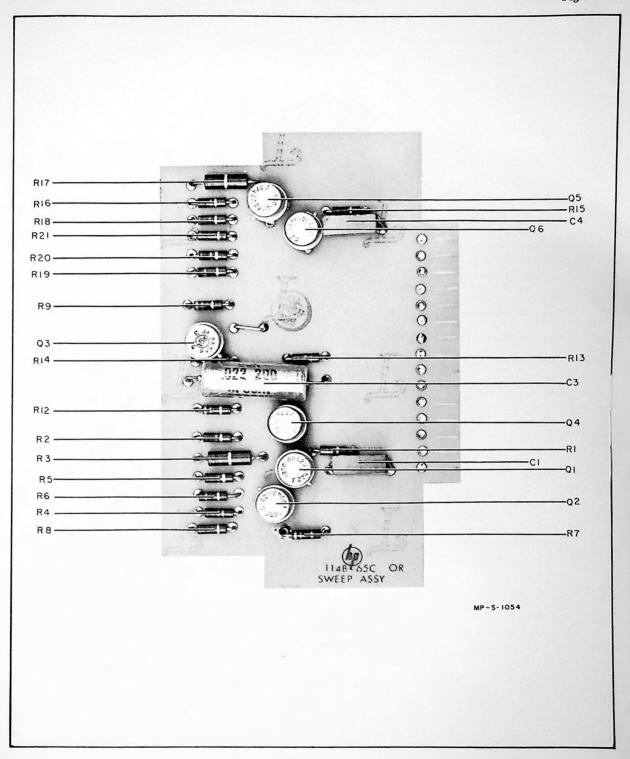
Sweep and Marker Assembly A7, Component Location
